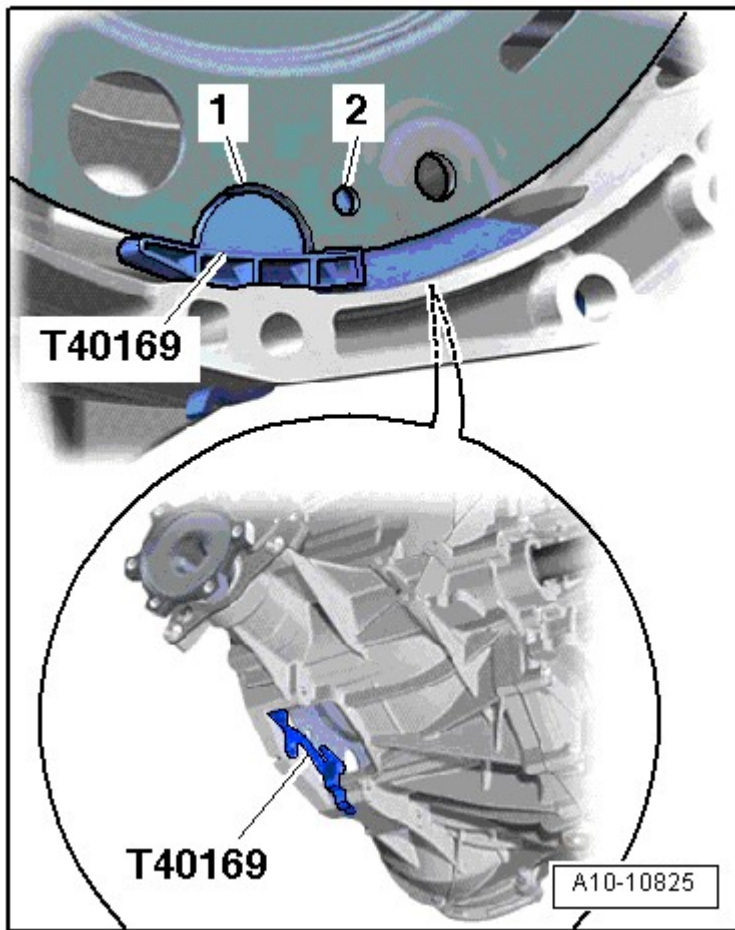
Inserting Assembly Aid T40169 Into Transmission Housing
